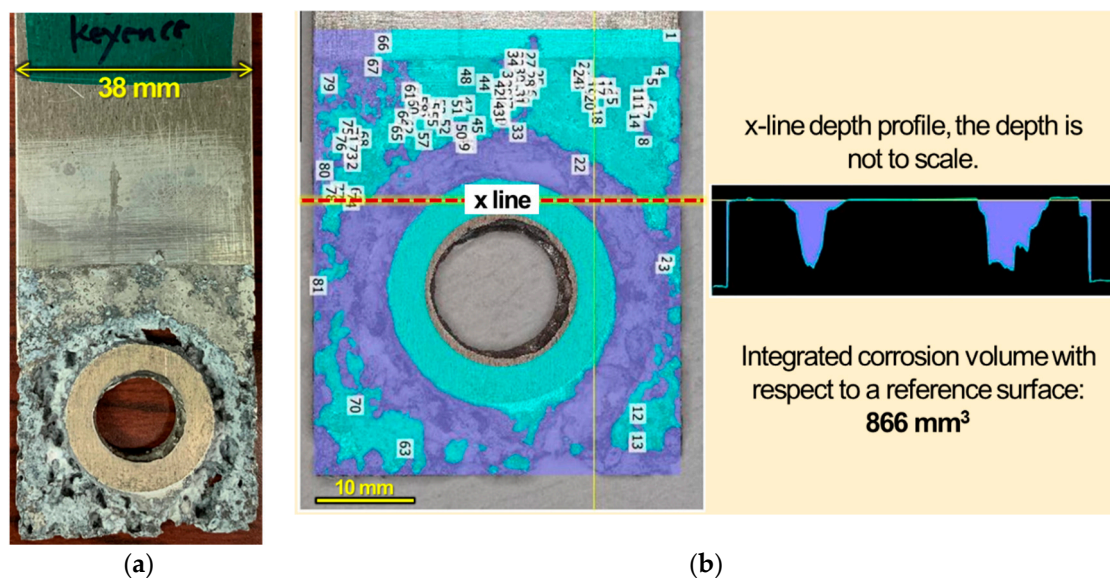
Photos of (a) a bare bolted joint with tape masking immersed in 0.1 M NaCl, and (b) another bare bolted joint that formed corrosion volume in the bottom of the AZ31B sheet after an immersion test for 404 h. Please note that tape masking was removed for the specimen shown in (b). The concept of unidirectional growth of corrosion volume in the AZ31B sheet is similar to the artificial pit growth of stainless steels introduced previously [1,2].
